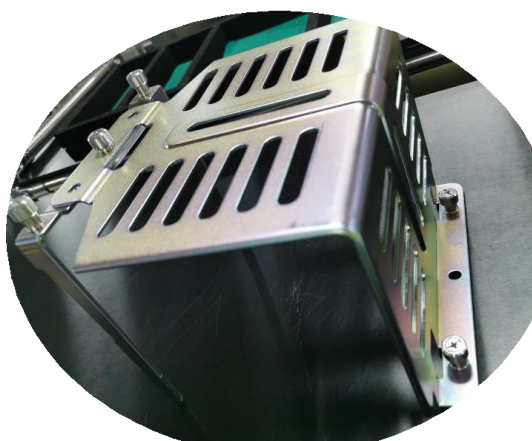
PCU Potector & Inverter Lock Plate Direction of pull. PCU Potector & Inverter Lock Plate removed together
